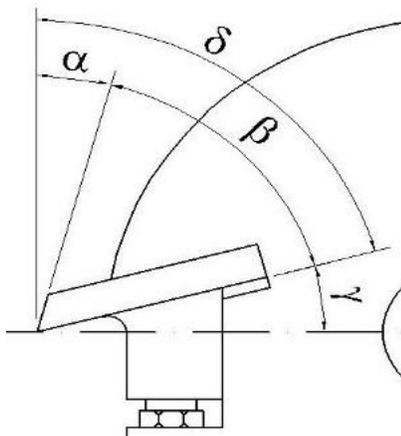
The angles of the cutting blades fitted in cutter head (Prokeš 1982)
